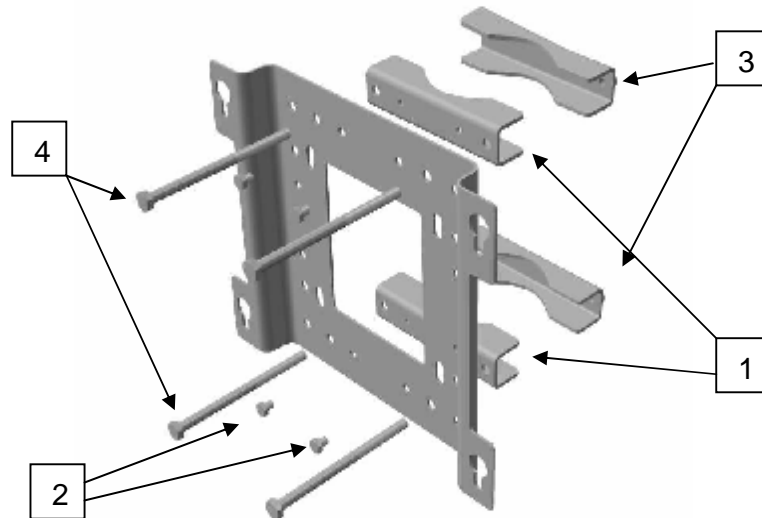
Fix the inner clamps to the mounting plate by using the four small screws.
